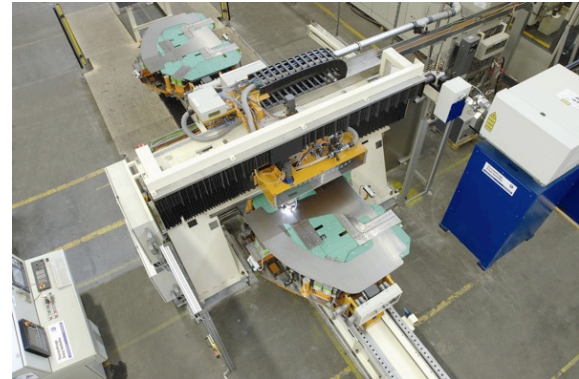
Moving-optics welding machine for 2-D welding with discontinuous material feed.
